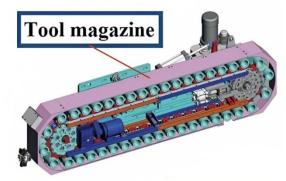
Structure of an automatic tool changer of computer numerical control machine tools [91]
